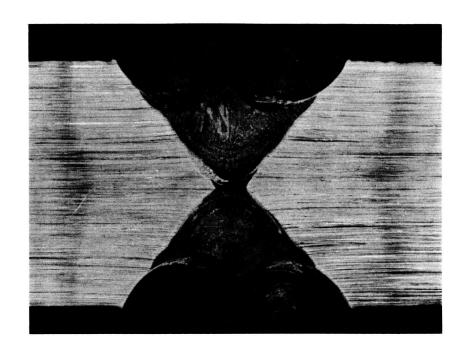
TYPICAL CROSS-SECTION AND JOINT PREPARATION FOR 1.00-INCH TIG WELDMENTS
